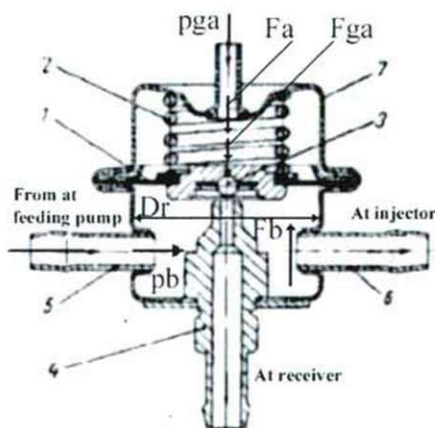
Scheme of pressure regulator: 1-membrane; 2- springs; 3- valve; 4- connection to the tank; 5- entrance connection; 6- exit connection; 7- housing.
